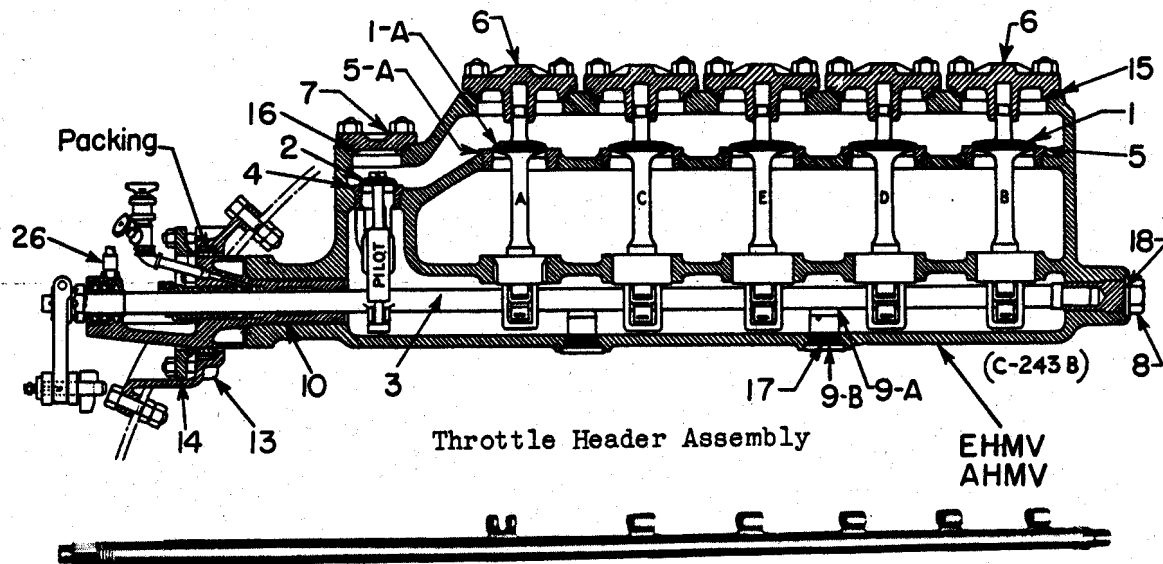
Throttle Header Assembly, Camshaft and Stuffing Box
